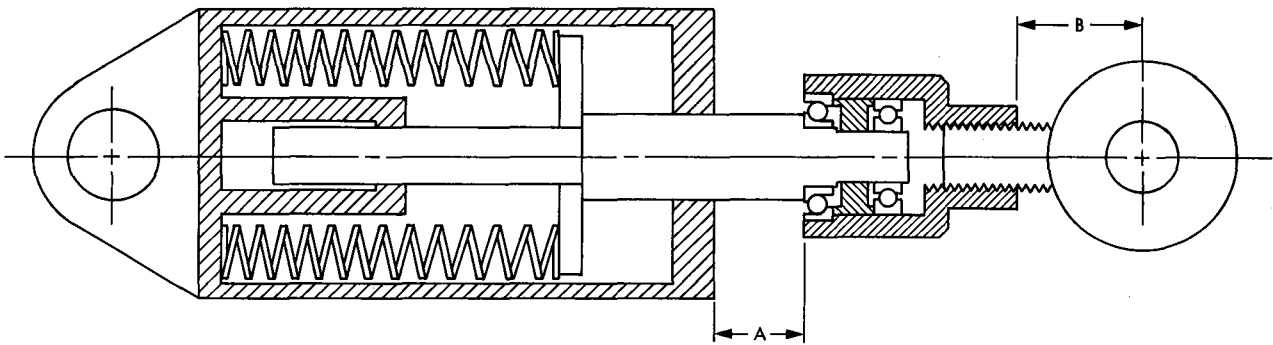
Schematic drawings of elevation drive spring loaded support struts
